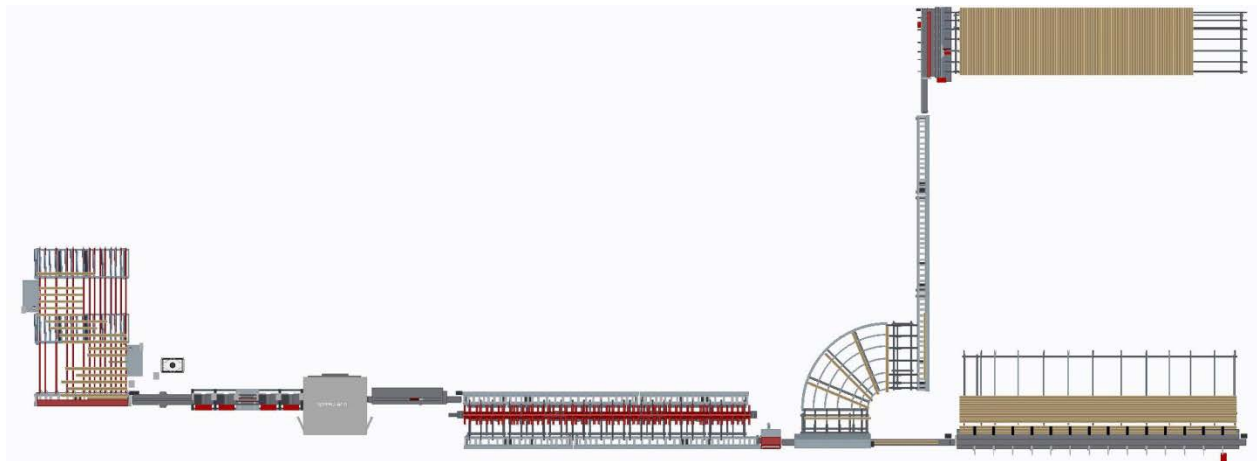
Line layout Stage II, lamella finger-jointing – single layer formation.
